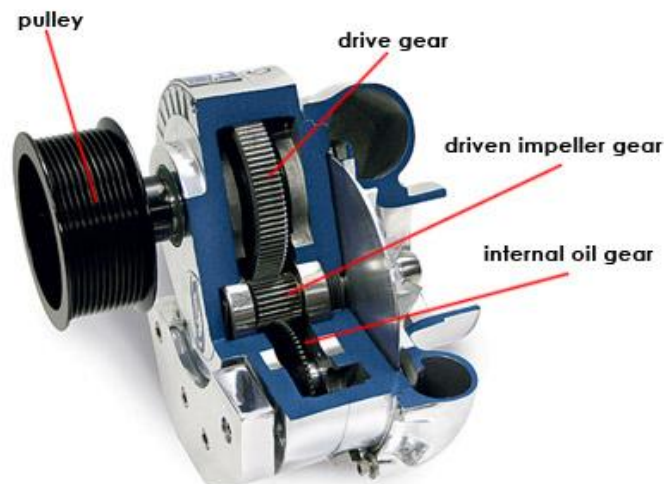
Cutaway view of a supercharger. (Retrieved from <http://auto.howstuffworks.com/supercharger1.htm> on April 14, 2008)
